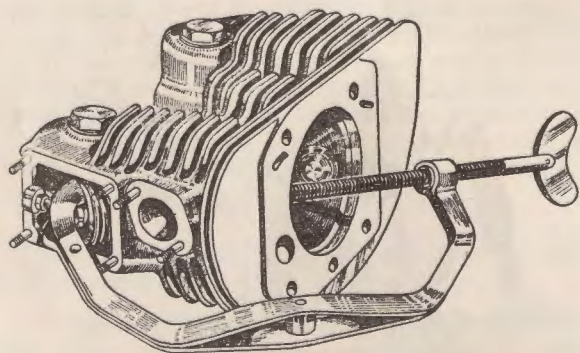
Using a suitable Valve Spring Compressing Tool.
